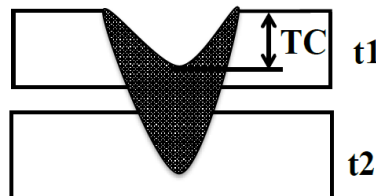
Top Surface Concavity (Remote Laser Welding)
